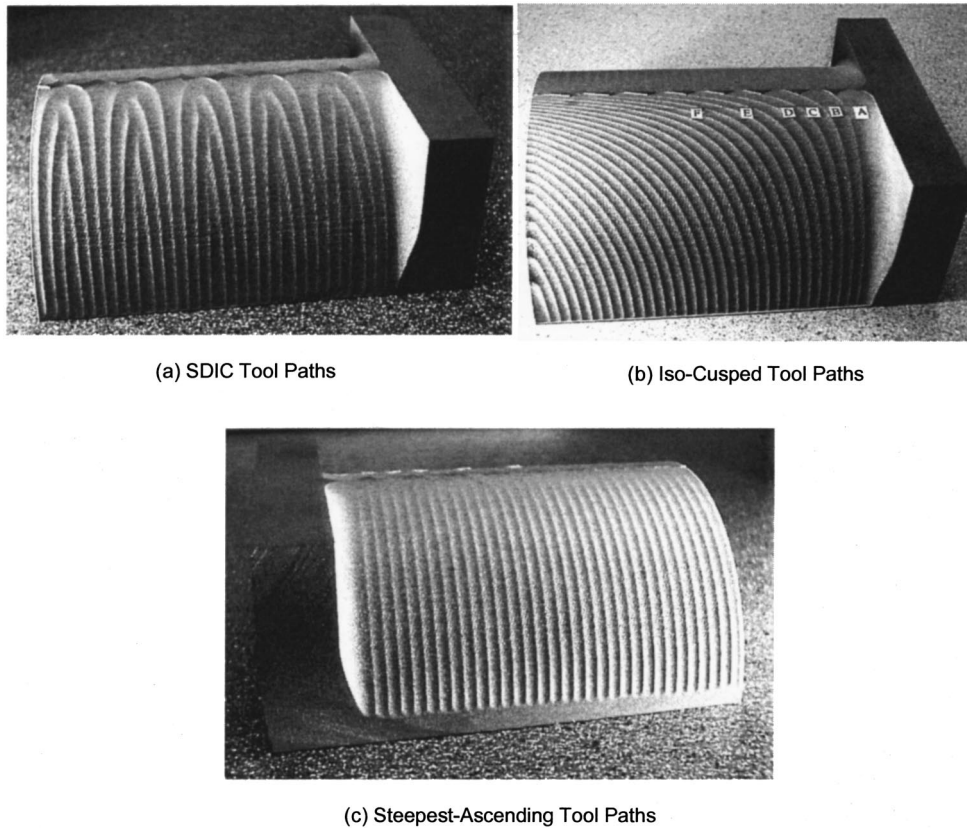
Three types of tool paths for the hemi-cylindrical part
